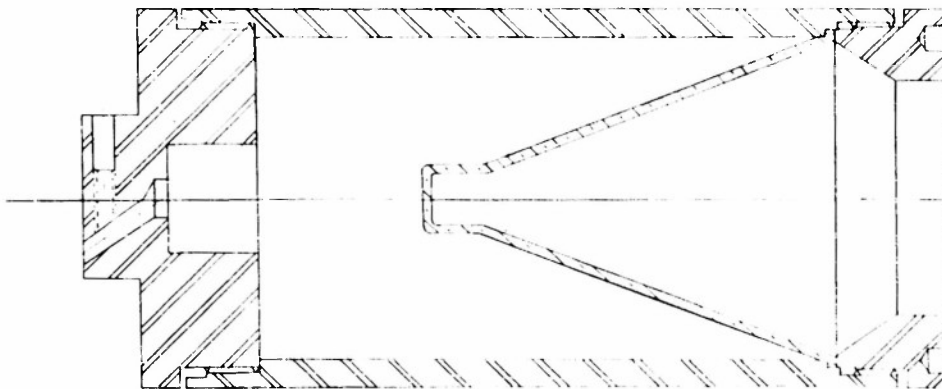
DRC506-1 90 mm. Penetration Test Assembly.
